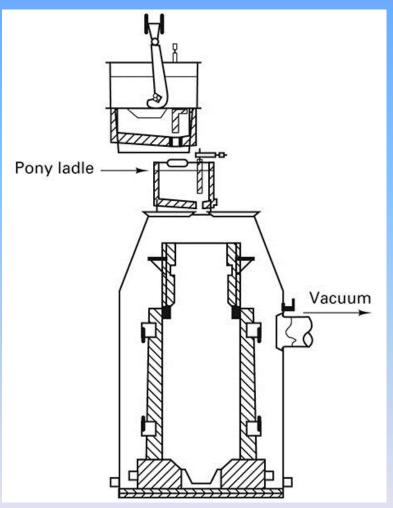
Method of degassing steel by pouring through a vacuum.
